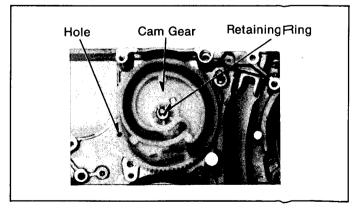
Assembly and Adjustment of Gears and Rod-(2)
